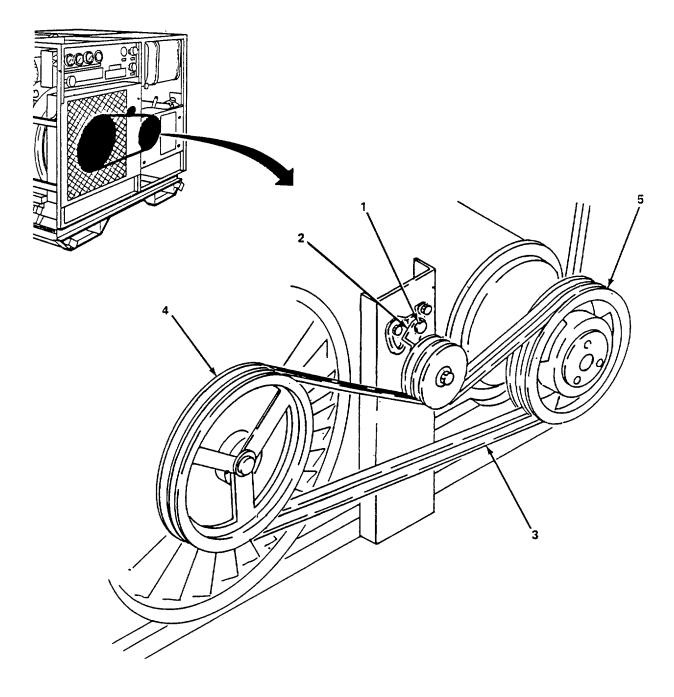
Compressor Drive Belt and Pulleys, Adjust.
